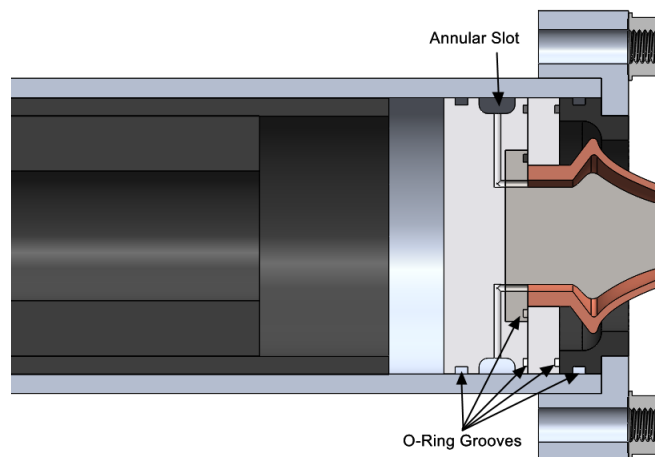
Complete Assembly in the Combustion Chamber
